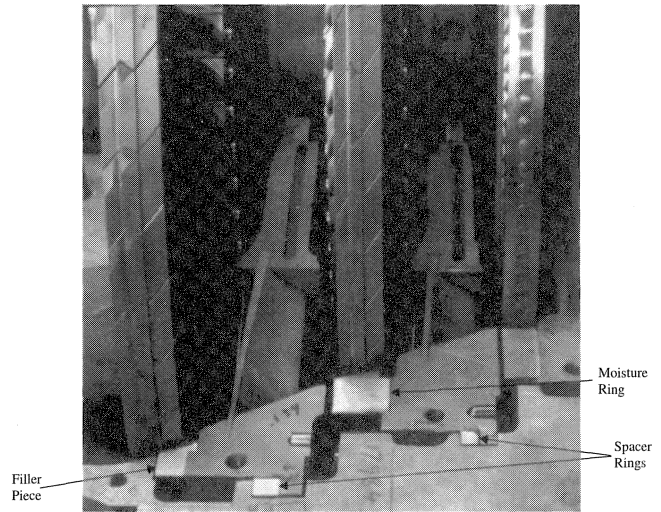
Casing with Rotor and Diaphragms Installed Showing Spacer Rings, Stage Five Moisture Ring, and Stage Six Filler Piece.
